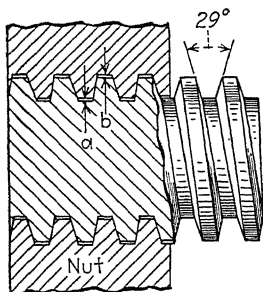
Acme screw in nut. *a*, clearance of 0.010 in. is obtained by boring the hole 0.020 in. larger than the major diameter of the screw; *b*, clearance of 0.010 in. obtained by making the major diameter of the tap 0.020 in. larger than the major diameter of the screw.
